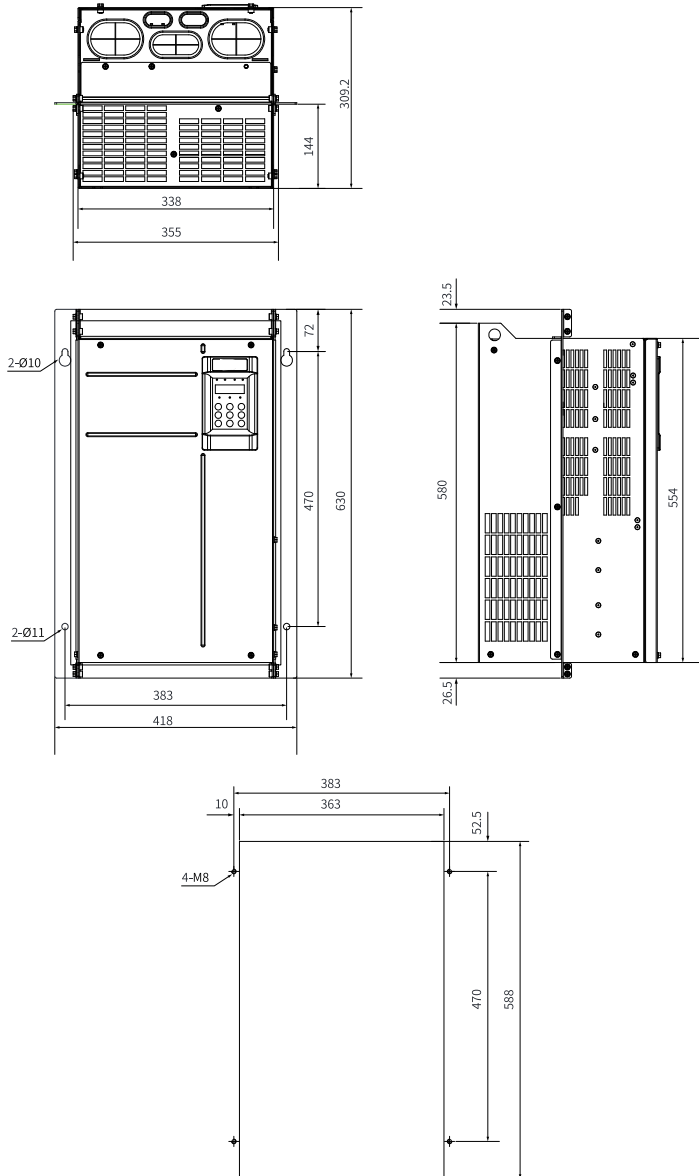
Dimensions of the MD500-AZJ-A1T8 bracket and mounting hole
